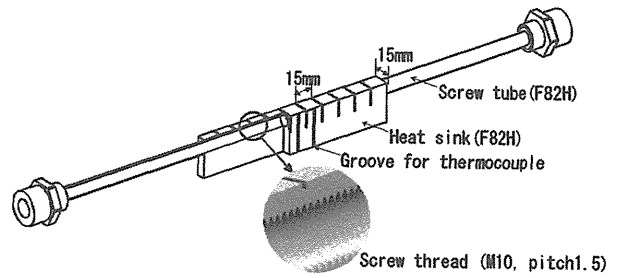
Divertor mockup with screw tube made of F82H
